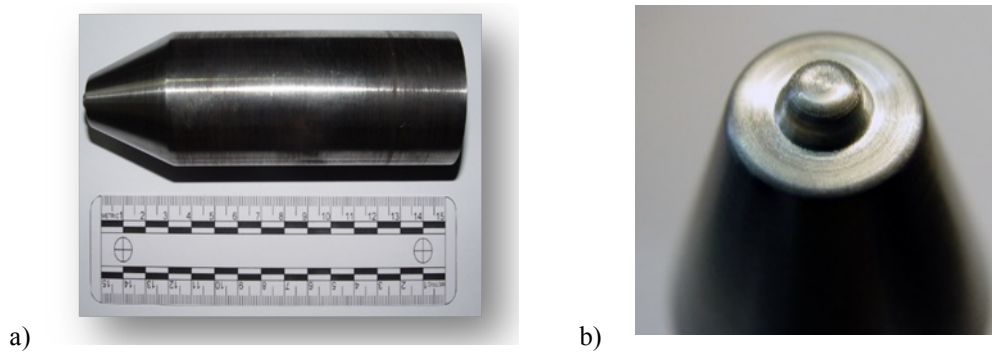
Tungsten matrix heavy sinter tool used in FSW process to weld cp-Ti sheets: a) entire tool; b) pin
